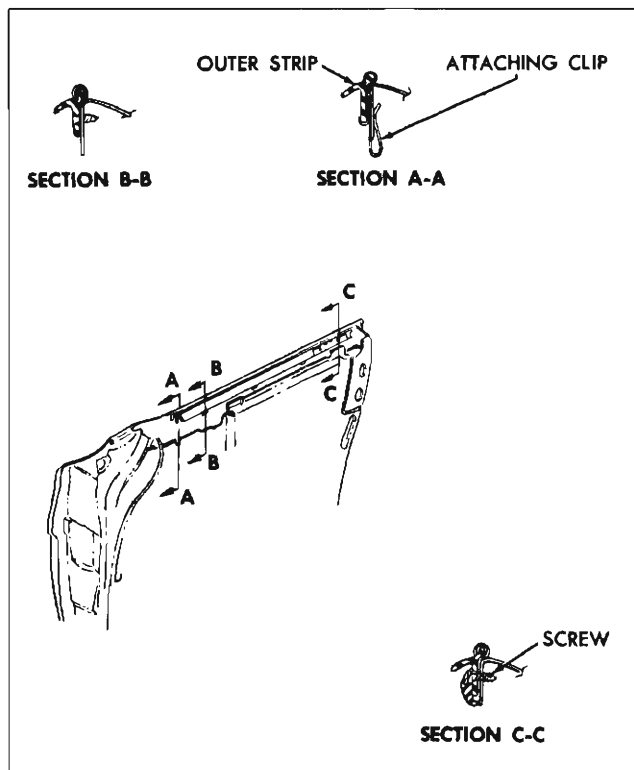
Door Window Glass Run Channel Outer Strip Assemblies (Without Belt Reveal Molding)
